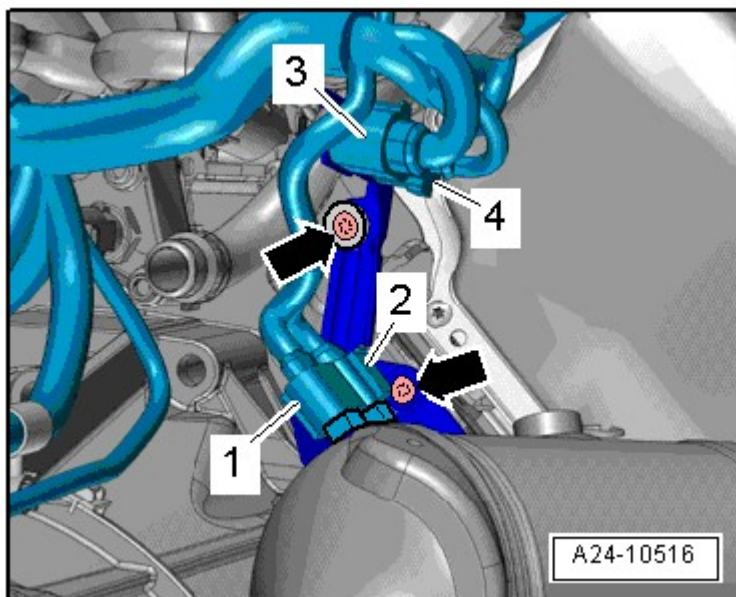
Identifying Bolts -Arrows- And Right Connector Bracket
